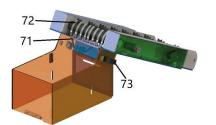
Conveyor belt bonded garbage cleaning unit -- cleaning the garbage of the conveyor belt
